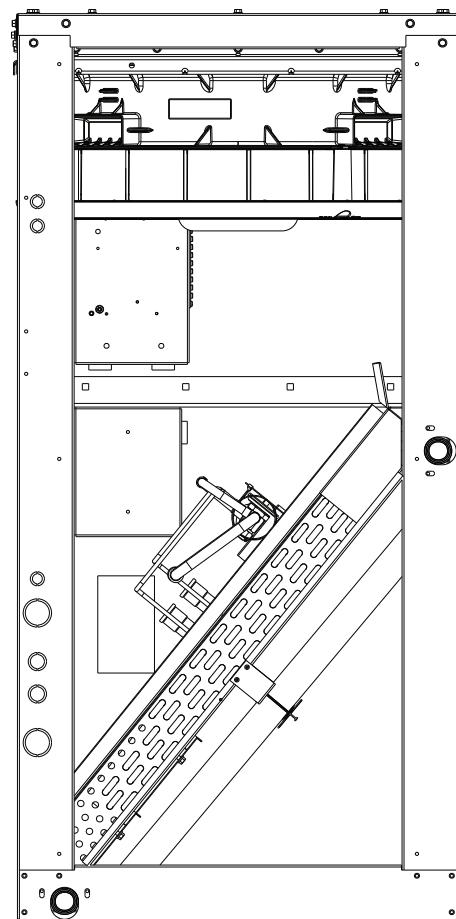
Fan Assembly, Side Panel Access (Side Panel Removed)
